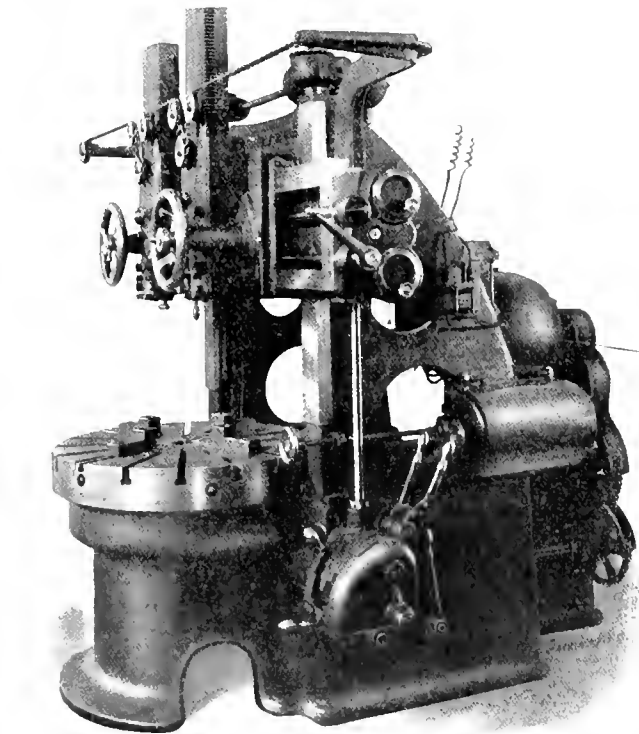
"Northern" Motor operating Gisholt Boring Mill, with Cutler-Hammer Gear-driven Drum Controller.
